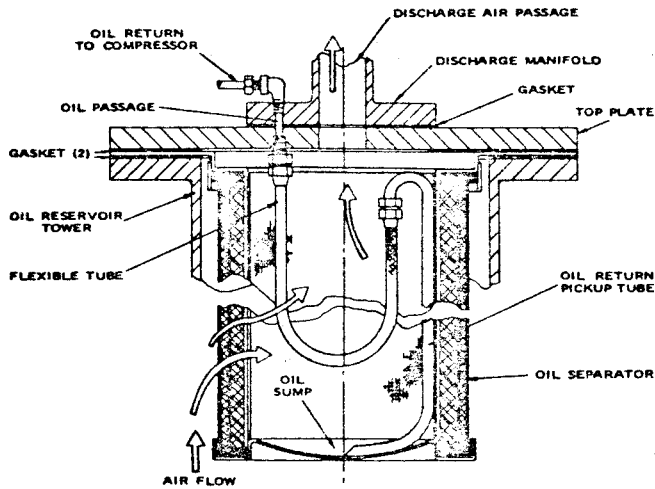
SINGLE-ELEMENT OIL SEPARATOR
